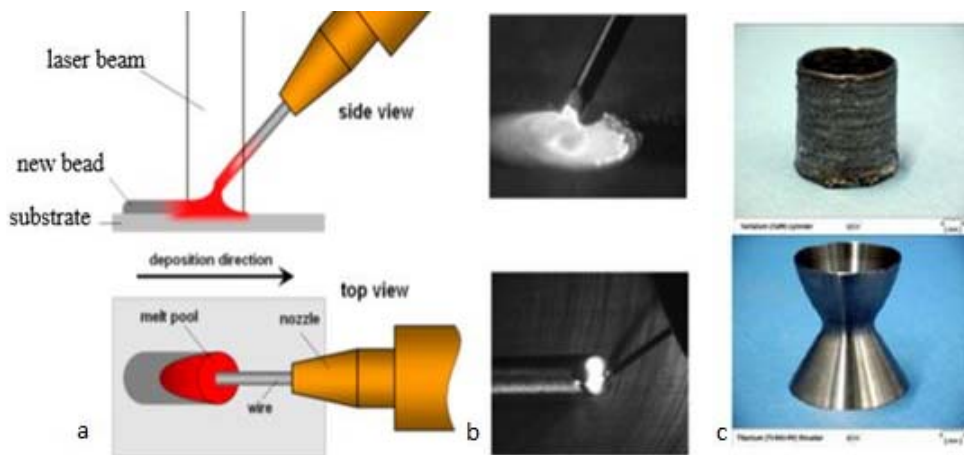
(a) Schematic drawing of the process; (b) top and side view images of a real process; and (c) Exemplary components: Ta-20W cylinder (as-built surface) [43]
